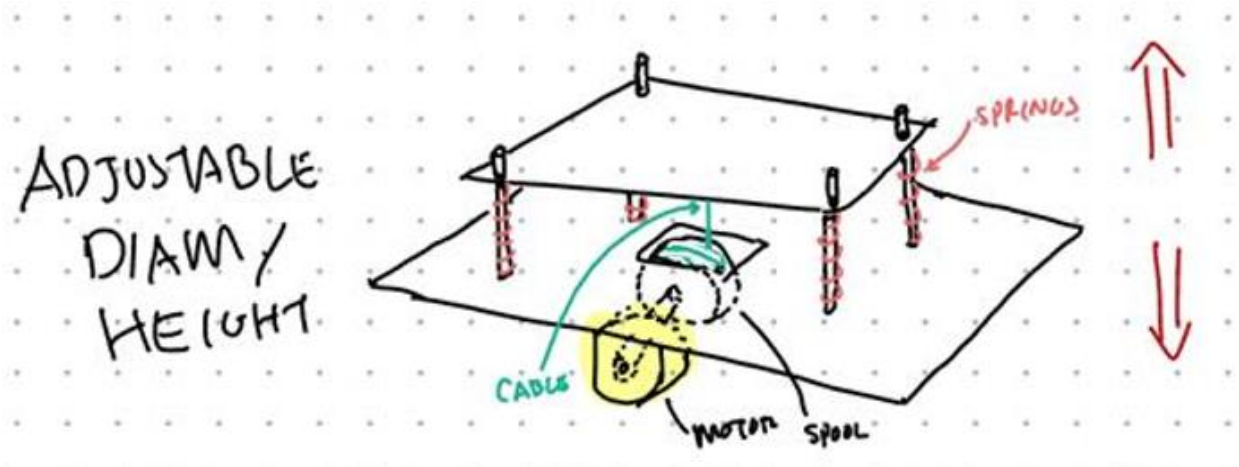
Sketch showing one method for adjusting the height of a platform using a motor
